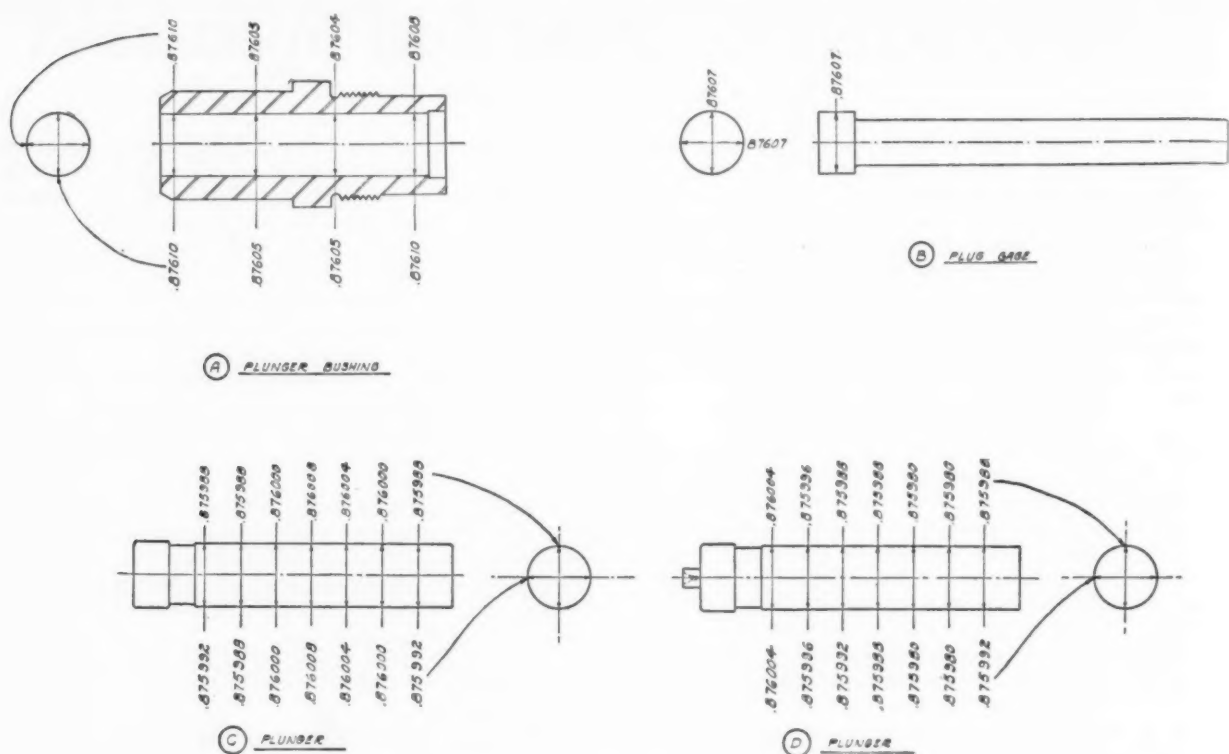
DIMENSIONS OF TEST PLUNGERS AND BUSHING
